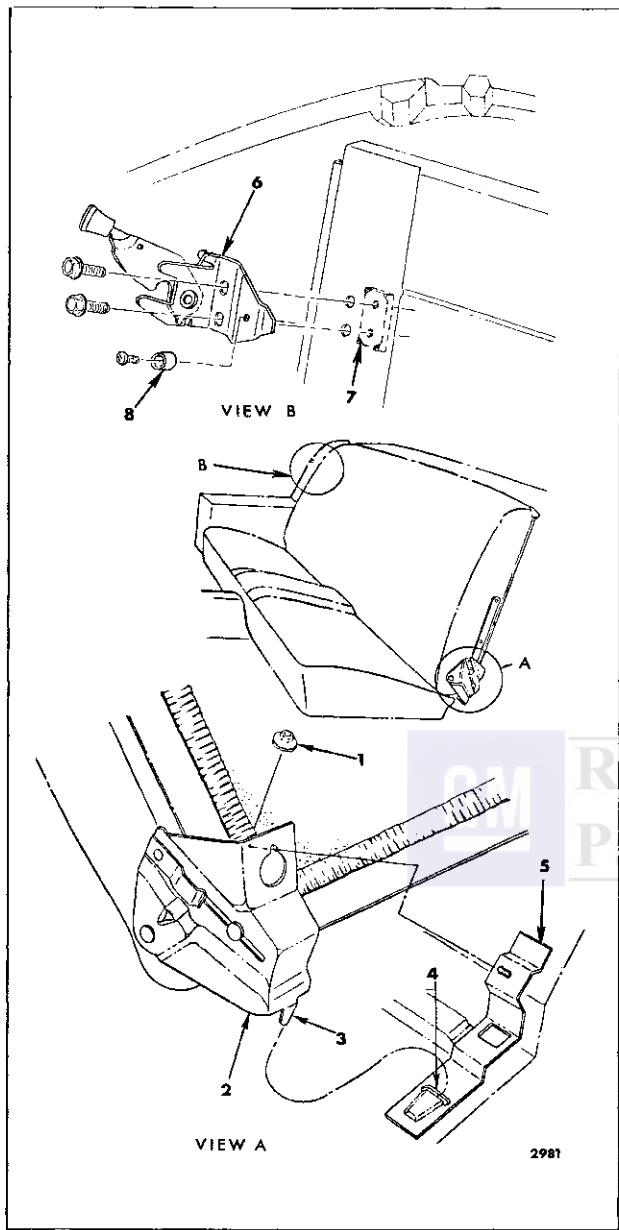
Folding Rear Seat Back Assembly — "F" Body Styles
